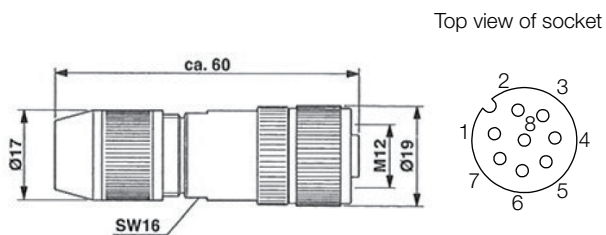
Connector BCC M478-0000-1A-000-43x834-000
